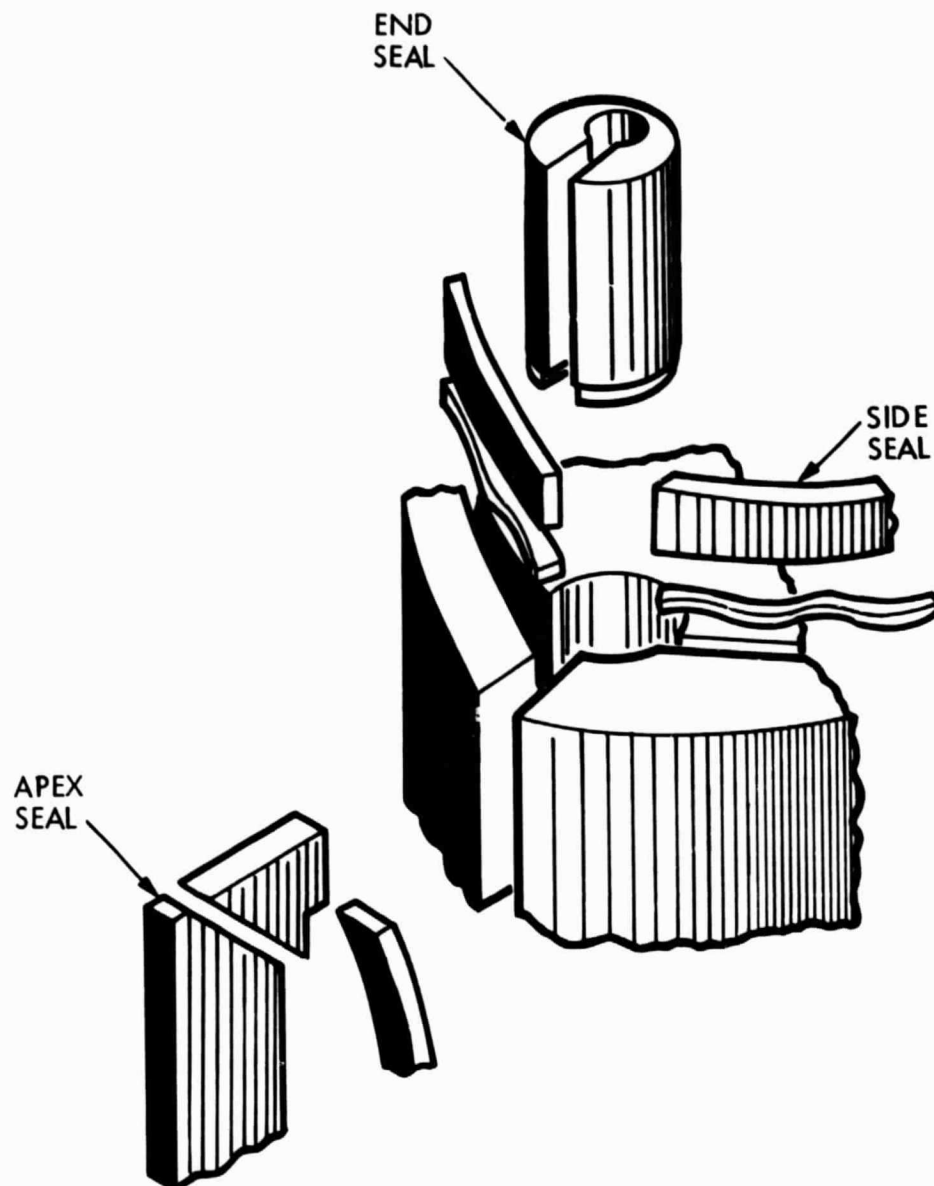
Rotor Sealing Elements Include Multi-Piece Apex Seal Mating with Trochoid Surface, Side Seals Running Against Side Housing, and End Seal to Which Others Converge (Ref. 64)
